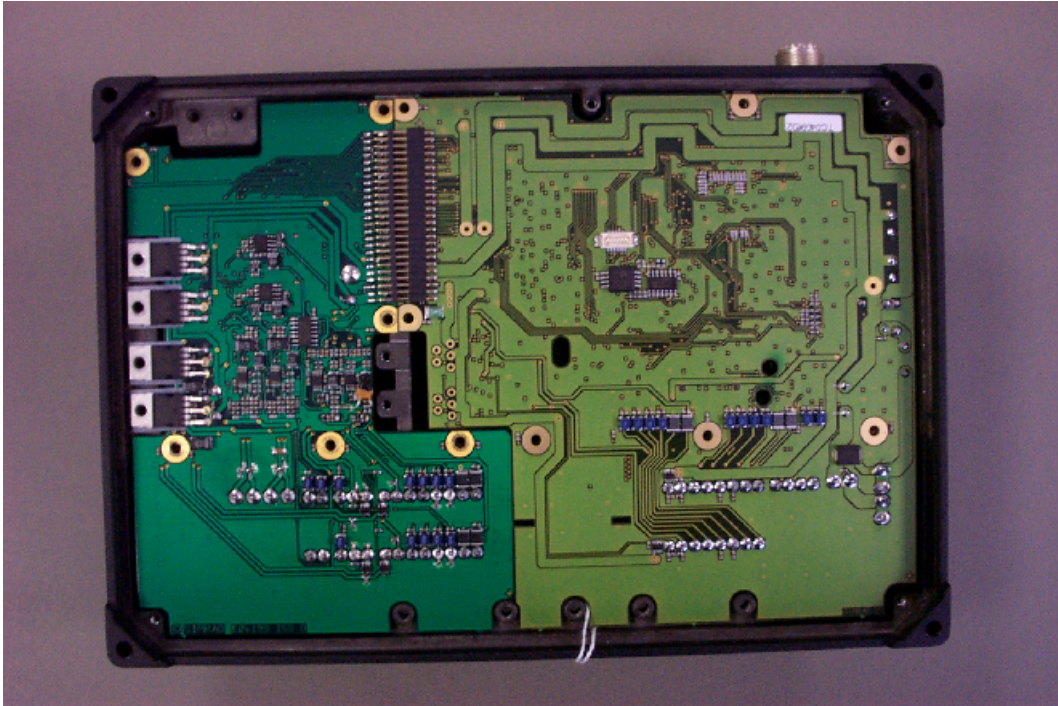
Interior View of Transceiver with Expansion PCB fitted
